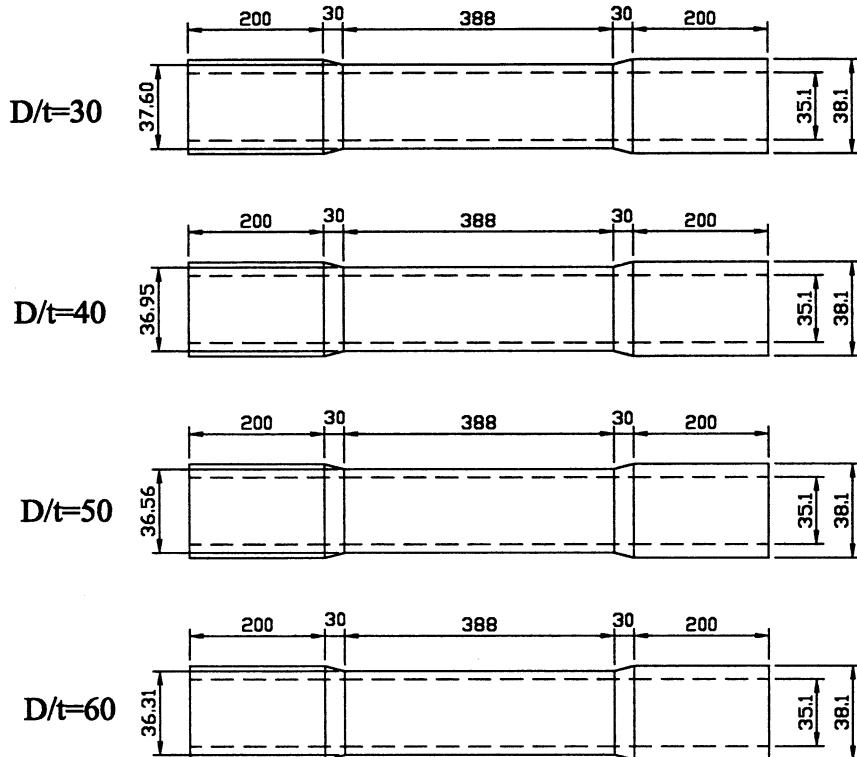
Geometry of the tested circular tubes (all dimensions in mm).
